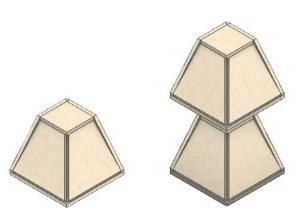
Corner piece assembled with remaining slits in certain edges due to only straight cuts
